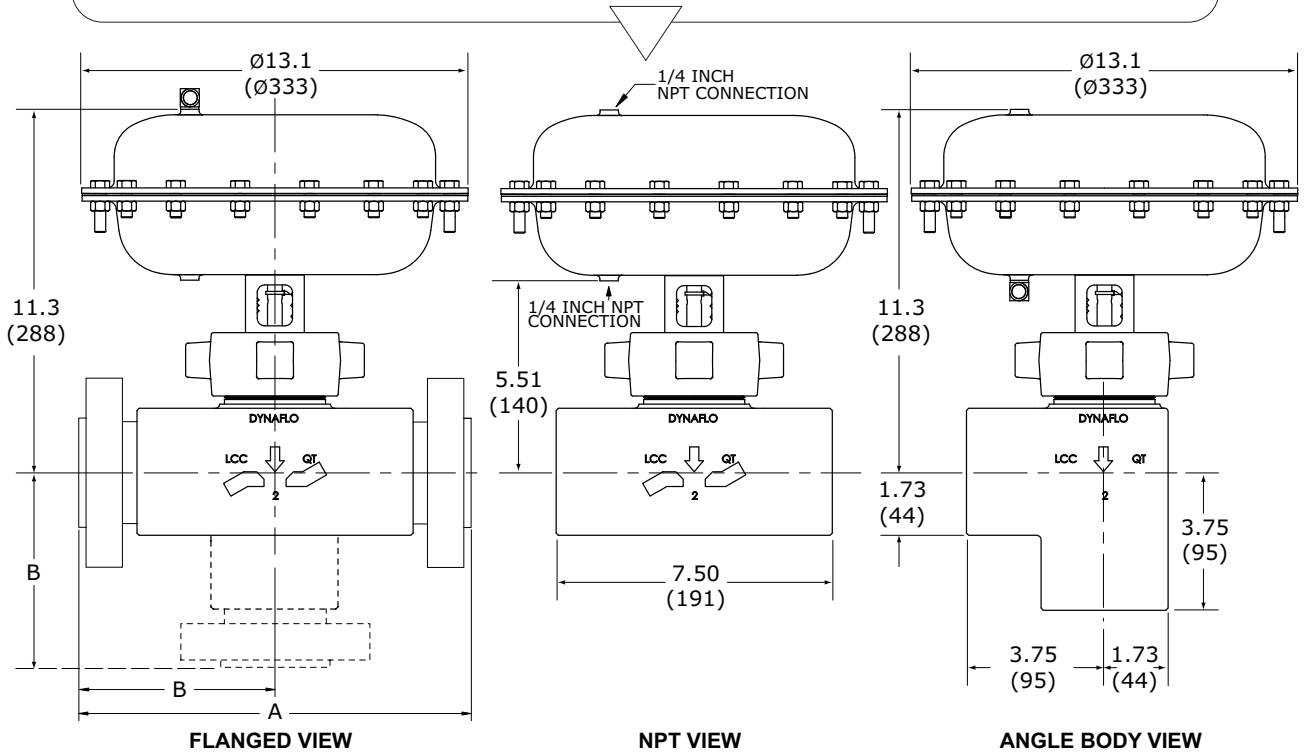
DF269 2 inch Control Valve Dimensions inch (mm)
